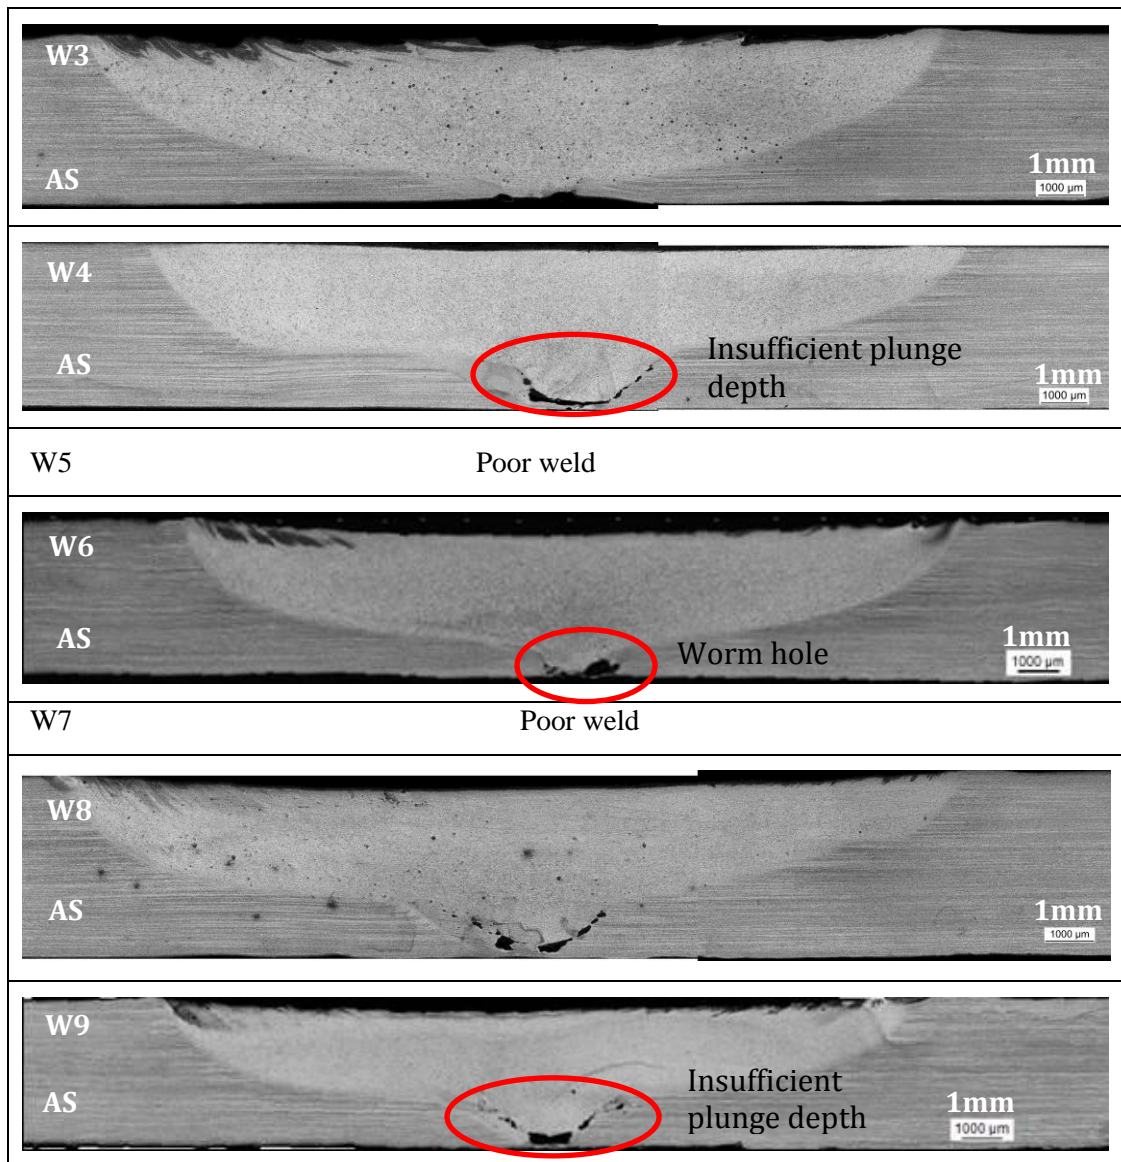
Macrostructure showing transverse section of Ti-6Al-4V welded sample. W5 and W7 were of poor weld and not shown here.
